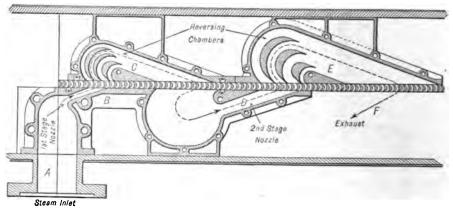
Westinghouse-Two-Stage Impulse Turbine.
